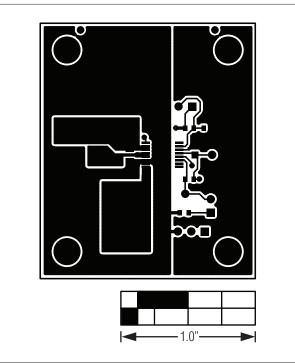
MAX16903 EV Kit PCB Layout—Component Side
